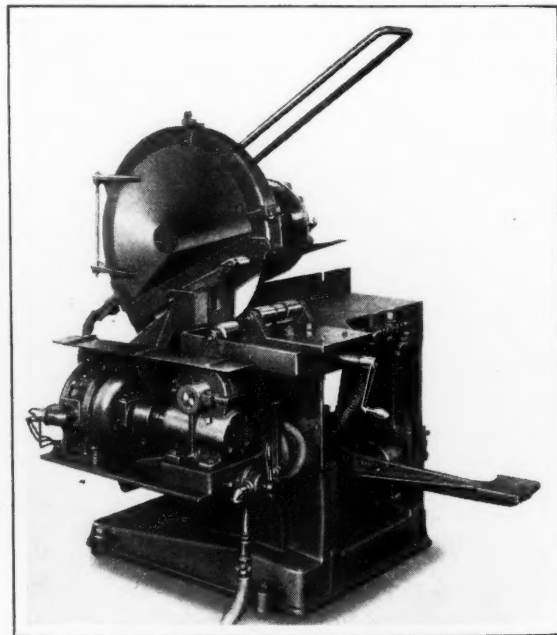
Ryerson High-speed Friction Saw with Stock-rotating Attachment
